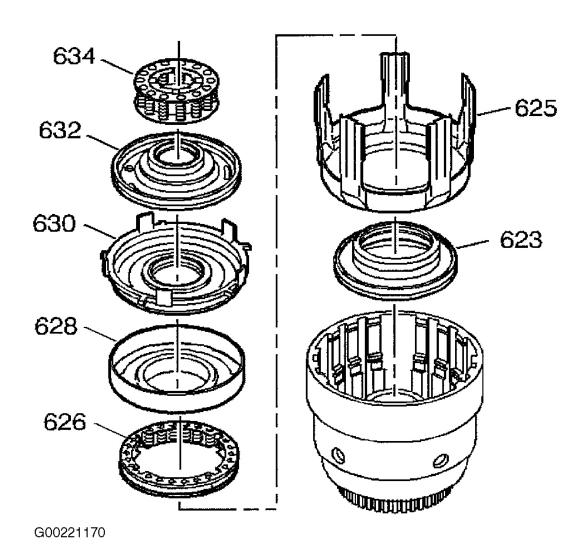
Removing Forward And Overrun Clutch Plates Courtesy of GENERAL MOTORS CORP.
